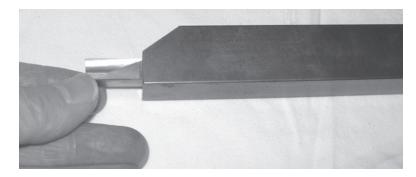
Insert the single-point tool in the holder as shown. Tighten the set screw (on the back) on the holder.
